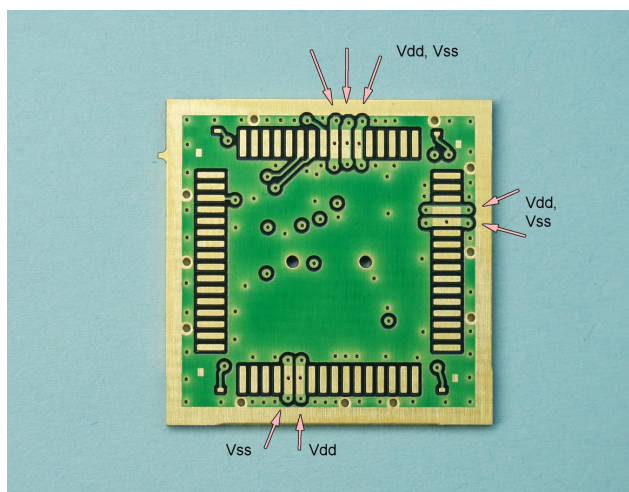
EMS testboard 4-layer unassembled, top side with dimensions 22,7mm x 22,7mm for 64 QFP DUT (μ C).
